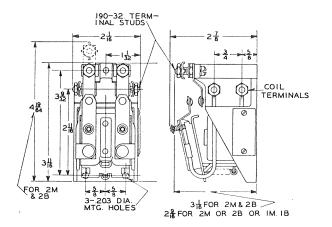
Outline and Drilling Plan for the Open Type SG Auxiliary Relay
